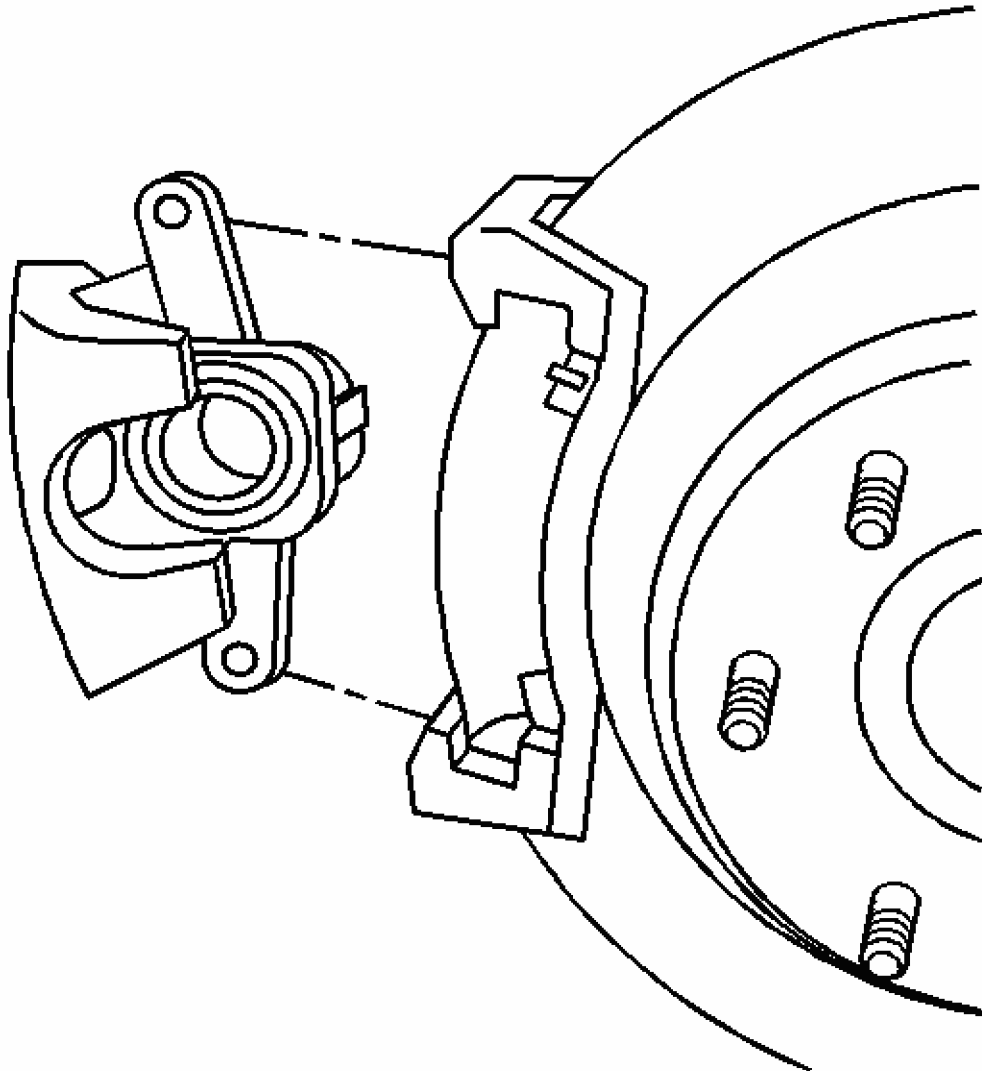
View Of Caliper To Caliper Mounting Bracket
